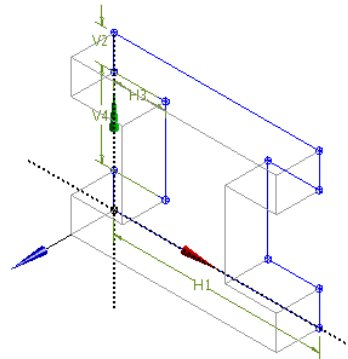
The preview of feature after choosing the Extrude tool
